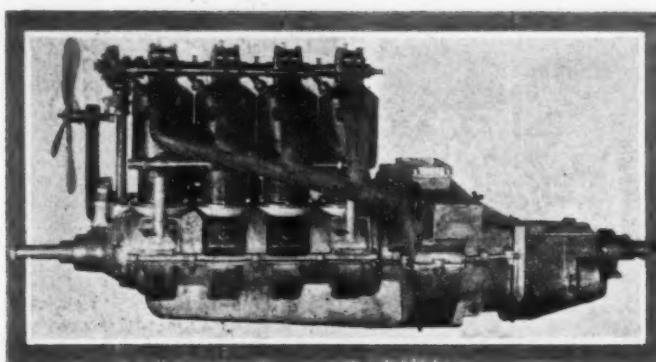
Exhaust side of Model 50 motor, showing full length of crankcase, and nicely contrived exhaust manifold
